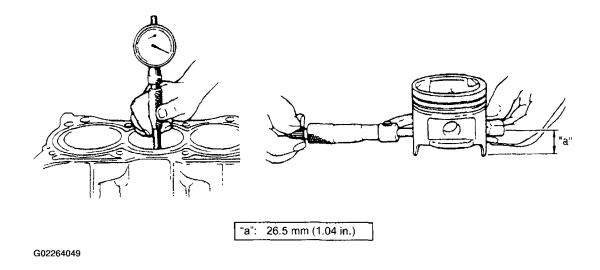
Measuring Cylinder Bore Diameter & Piston Diameter Courtesy of SUZUKI OF AMERICA CORP.
